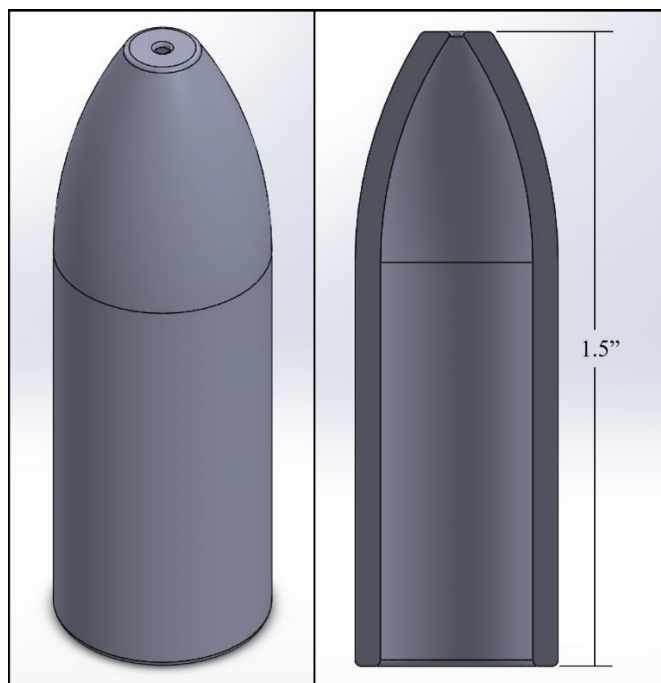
First version of the bullet design that was produced. (A) isometric view, (B) section view
